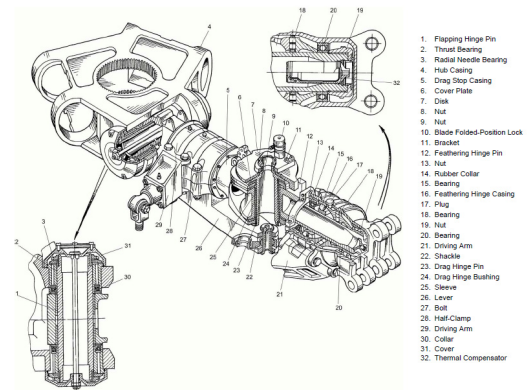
Upper rotor hub parts of the Ka-32 helicopter (IPC, Kamov Company)
